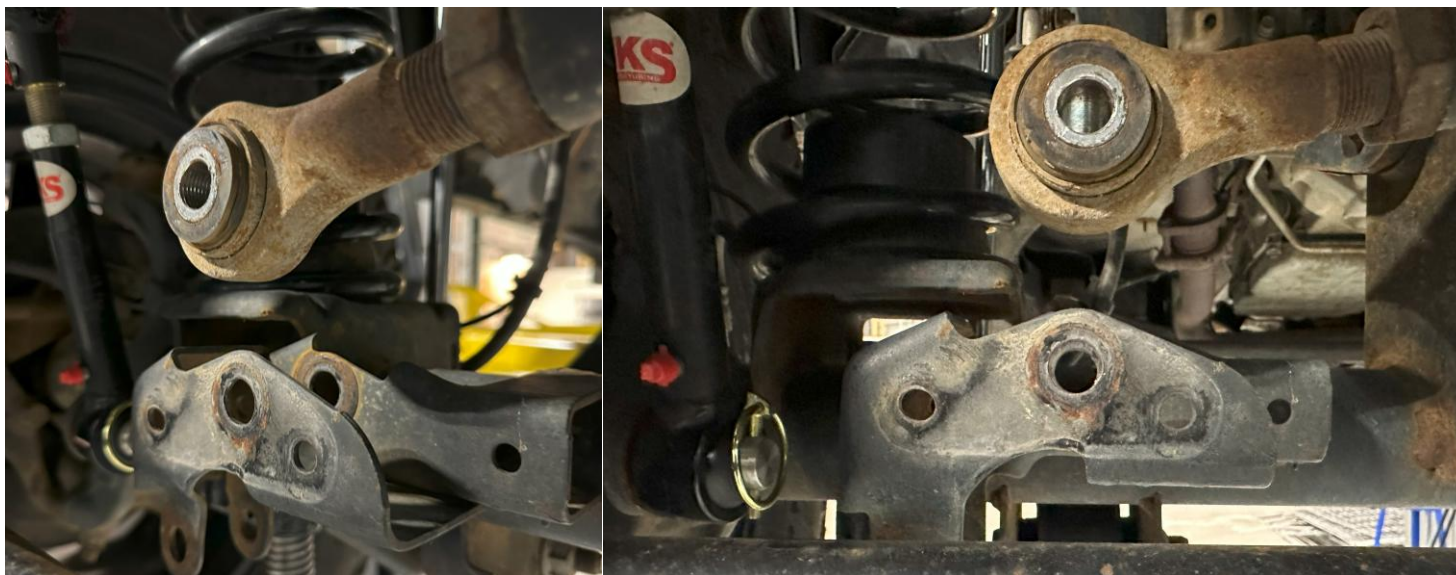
Steering stabilizer and track bar removed from factory mounting locations
